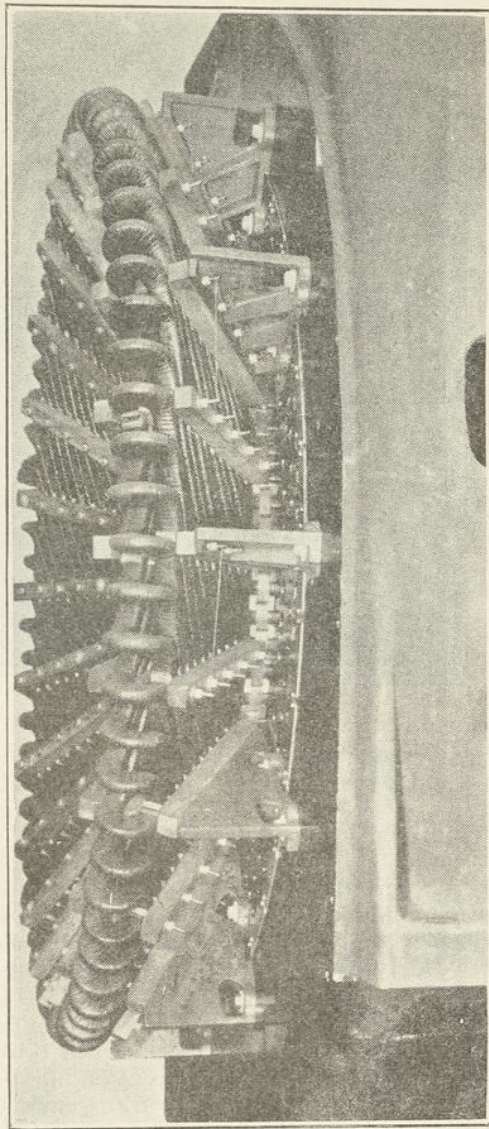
Bracing of End Windings of a Large Turbine Generator.
